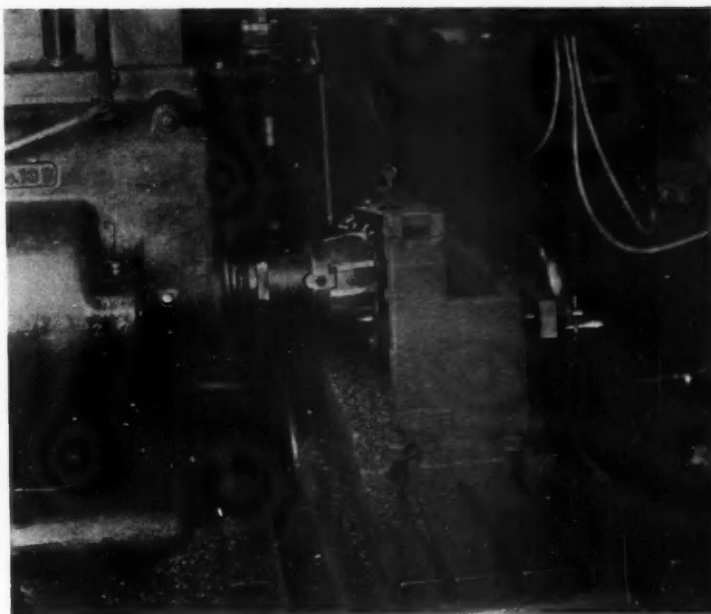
Using a left-hand face-milling cutter, the surface of the exhaust manifold is milled for the heater-valve cover plate + + + + + + + + +
